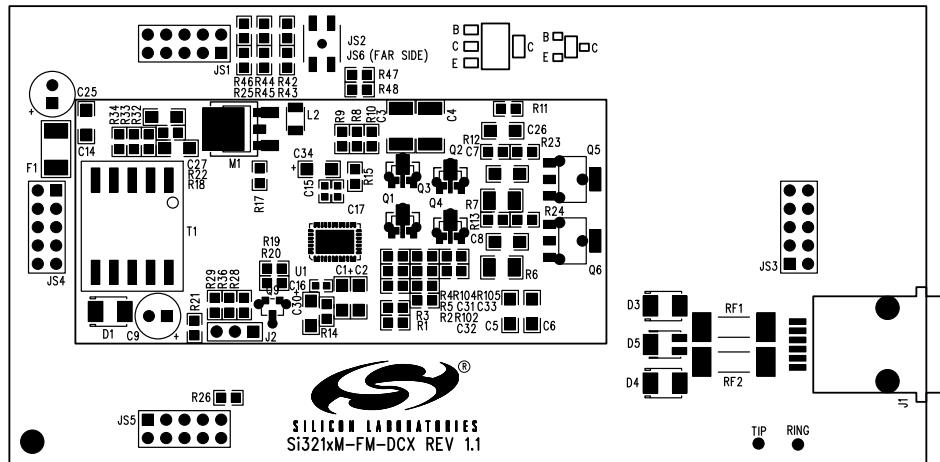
Si321xM-FM-DCX-EVB with Discretes Primary Assembly
